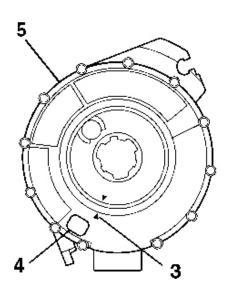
View Of Block Tooth Of Steering Shaft Assembly In 12 O'clock Position Courtesy of GENERAL MOTORS CORP.
